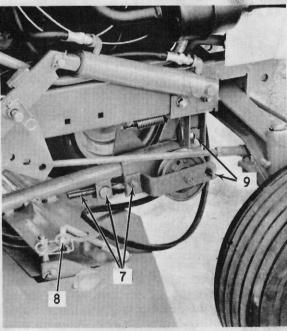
Connecting the Idler Assembly to Lift Frame and Front Brackets
